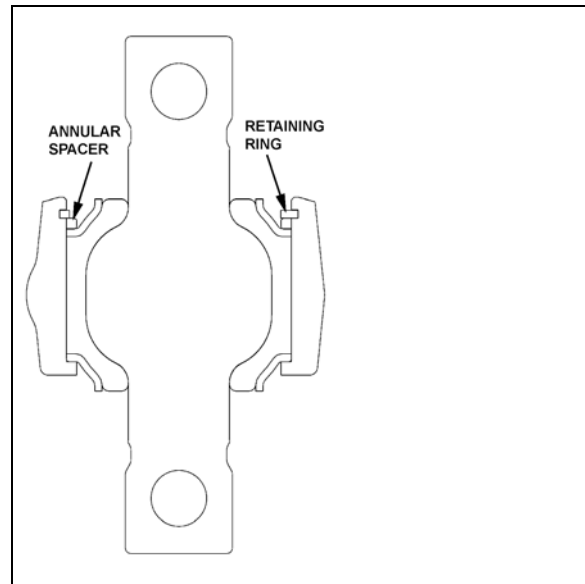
LOWER A-ARM BALL PIN BUSHING 16047
